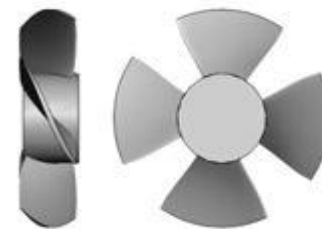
Top View and Side View of Blade Axial Flow Turbine
